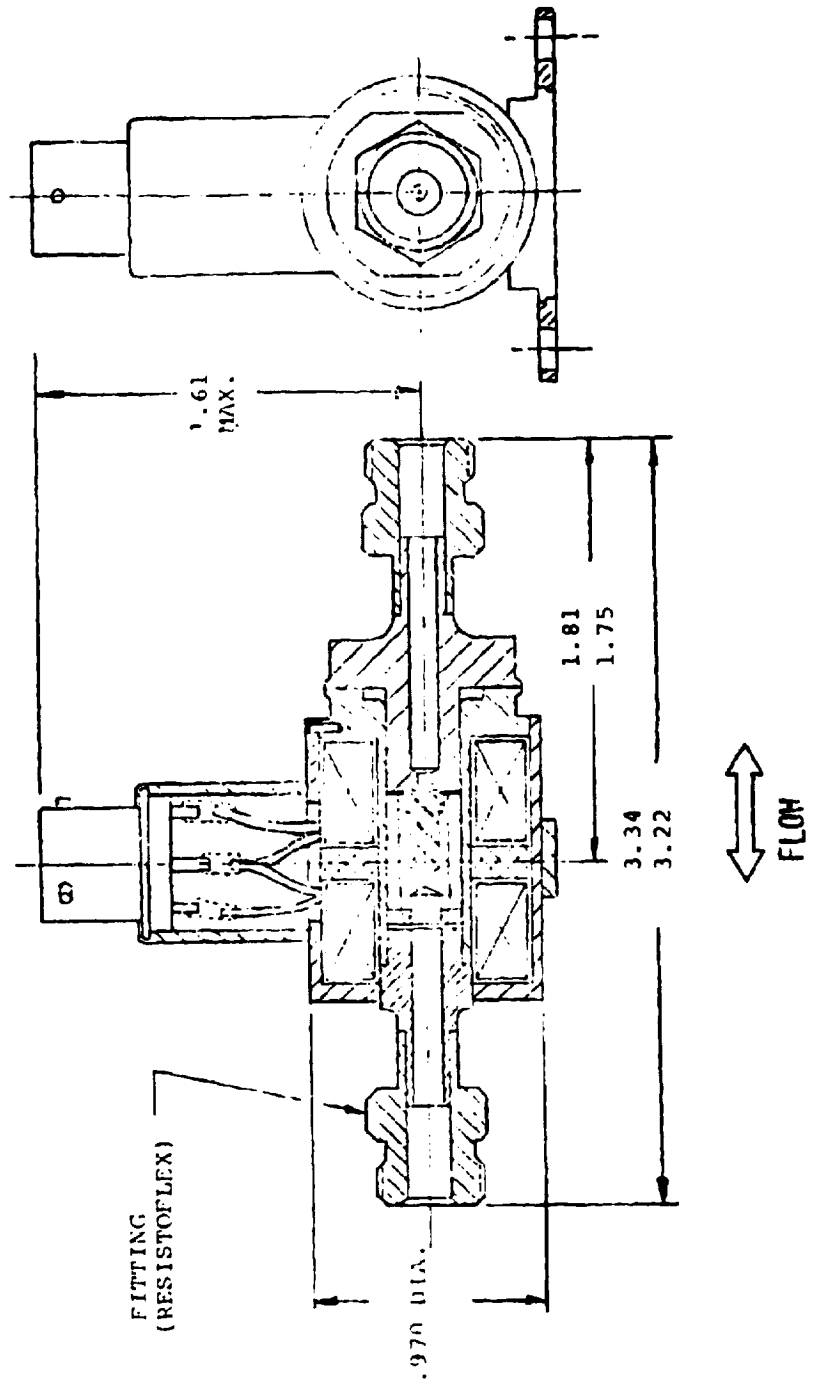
SOLENOID LATCHING VALVE
